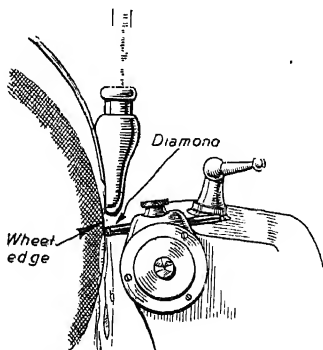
Truing a grinding wheel with a diamond cutter.
